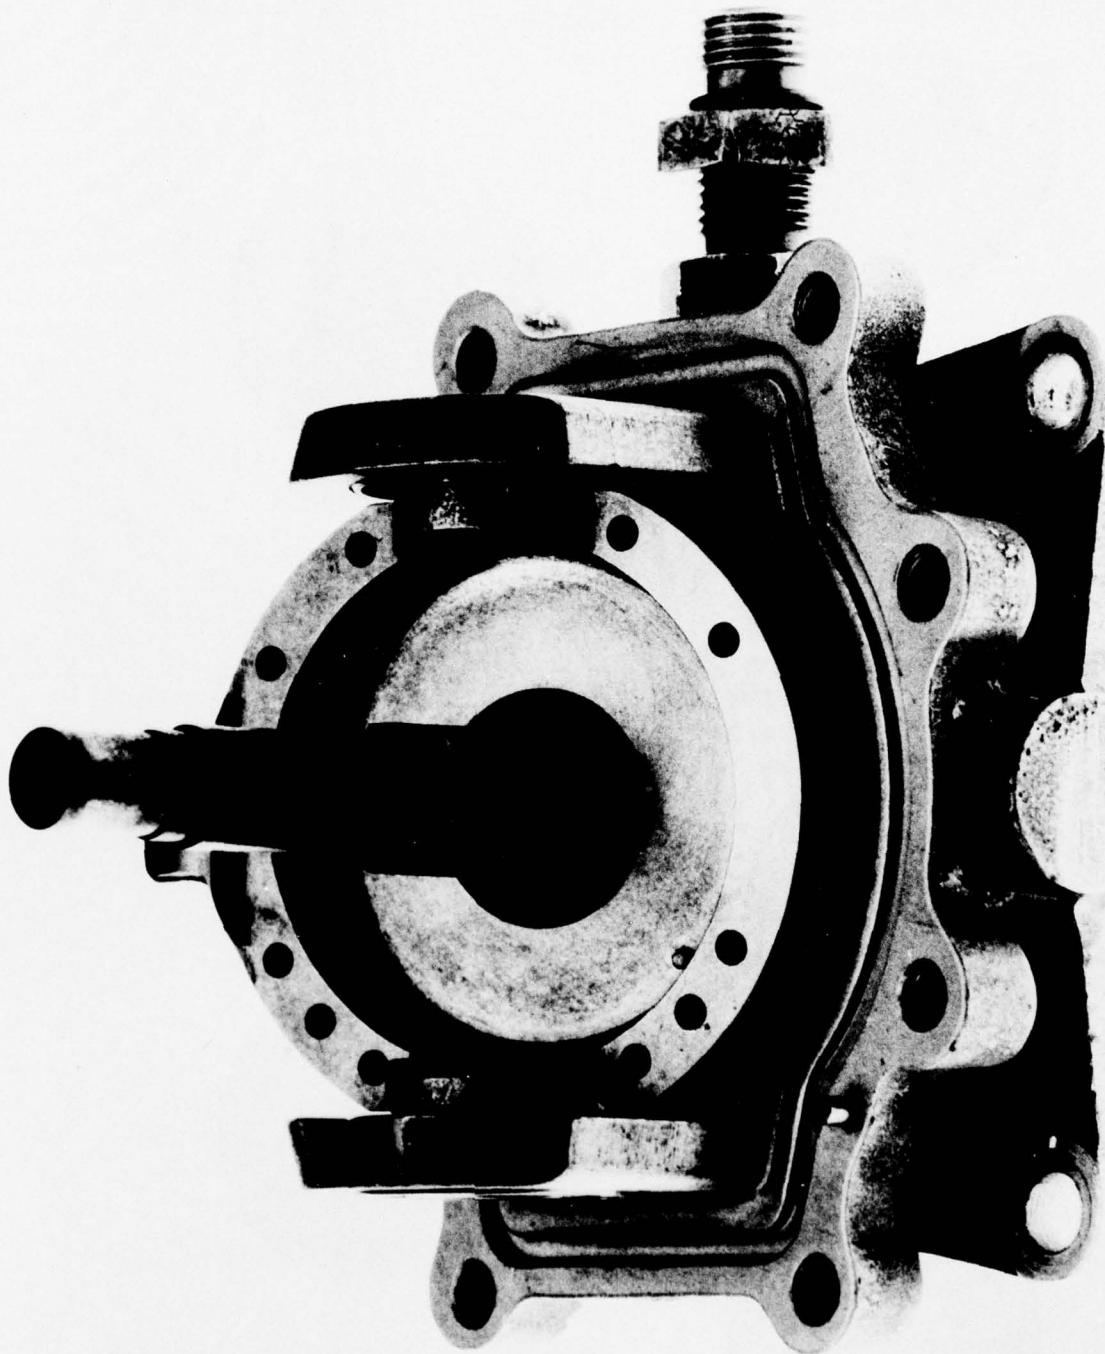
Drive Shaft and Yoke Assembly Before Test
